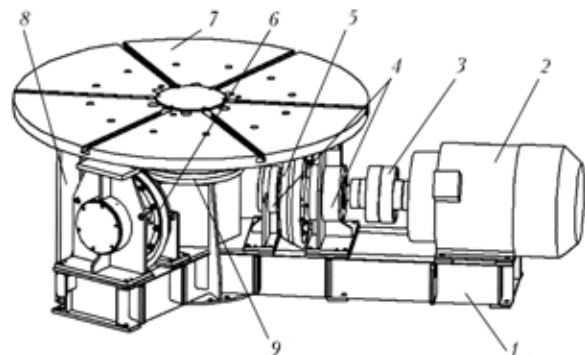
Design of the centrifugal machine: 1) stand, 2) electric motor, 3) connecting coupling, 4) varying section, 5) drive roll, 6) driven roll, 7) faceplate, 8) protective shield, 9) the central bearing section.
